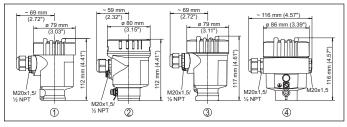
Housing versions for VEGASWING 61, 63, 66
